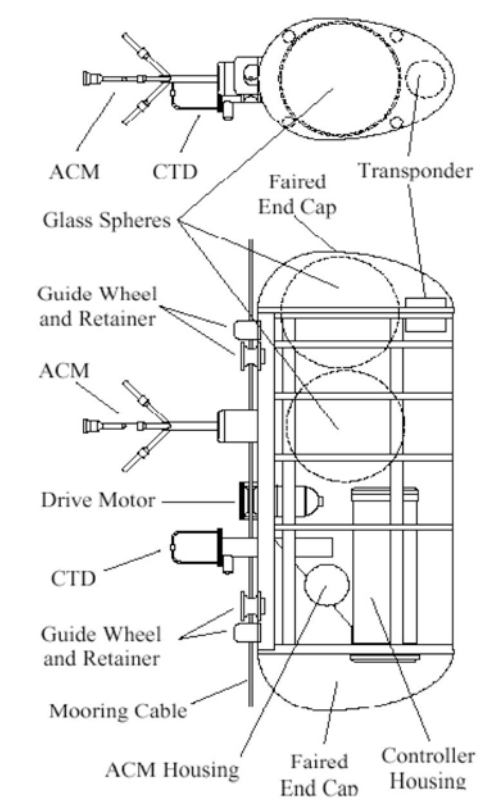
Cut away side and top views of the MMP showing the major components of the system. The overall dimensions of the faired external shell are 124 cm * 51 cm* 34 cm
